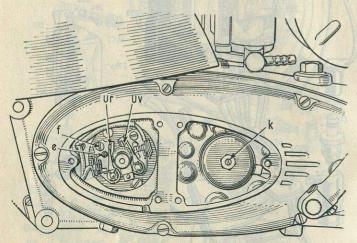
Contact-breaker Adjustment: Messerschmitt
